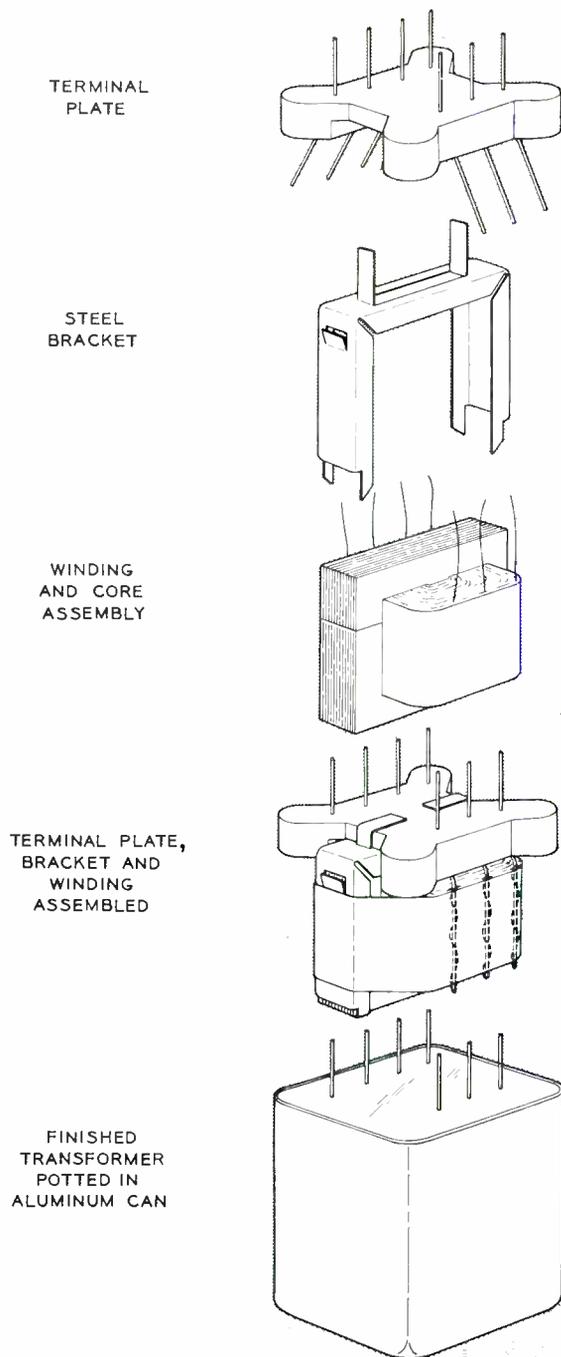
Exploded drawing of transformer showing the major parts and construction details.
